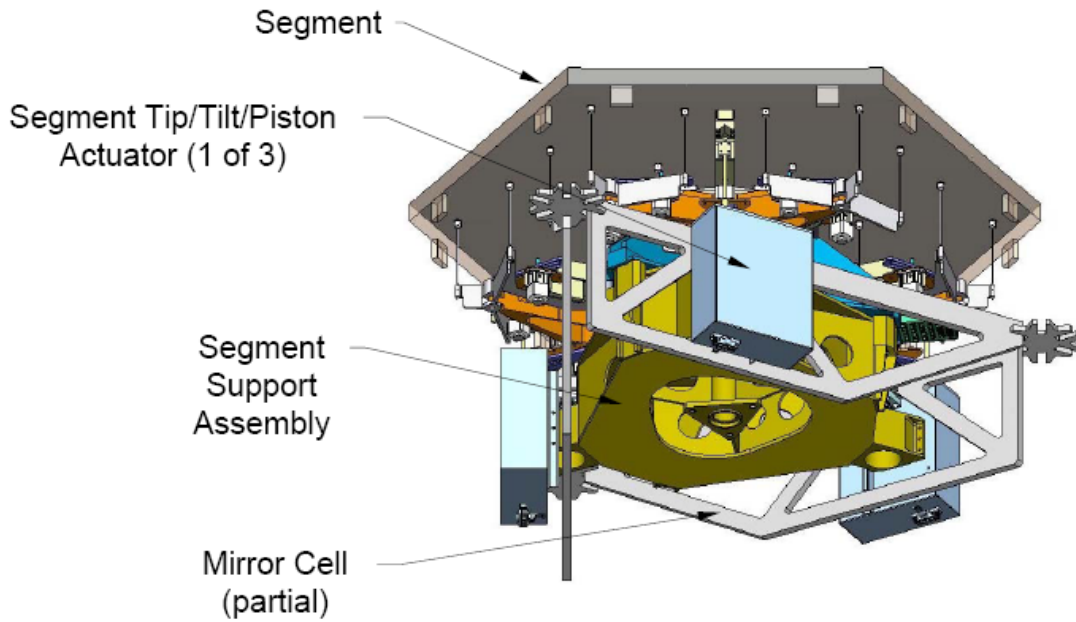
A single segment, its Segment Support Assembly, actuators, and the portion of the Mirror Cell to which it is mounted.
